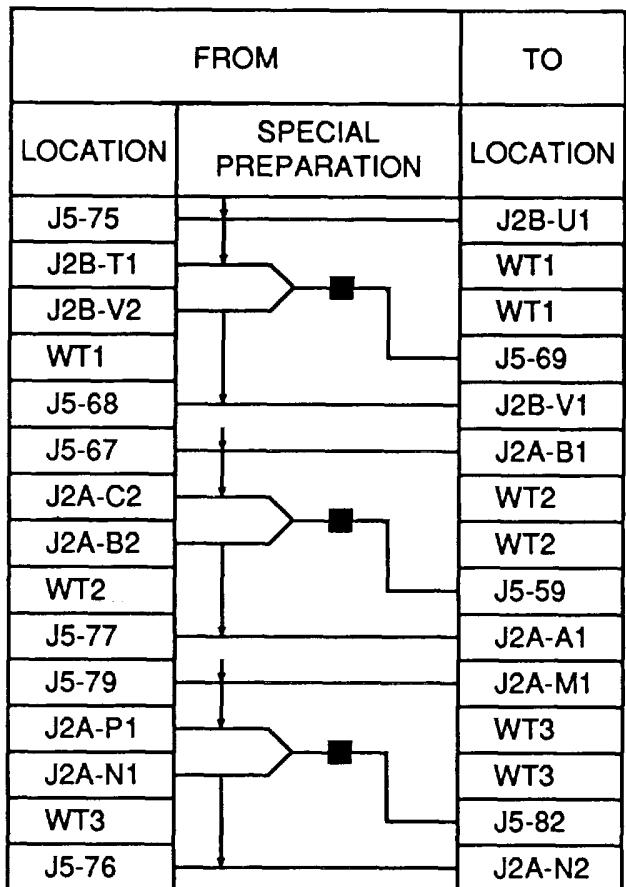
UNIBUS In Adapter Assembly Wiring List
